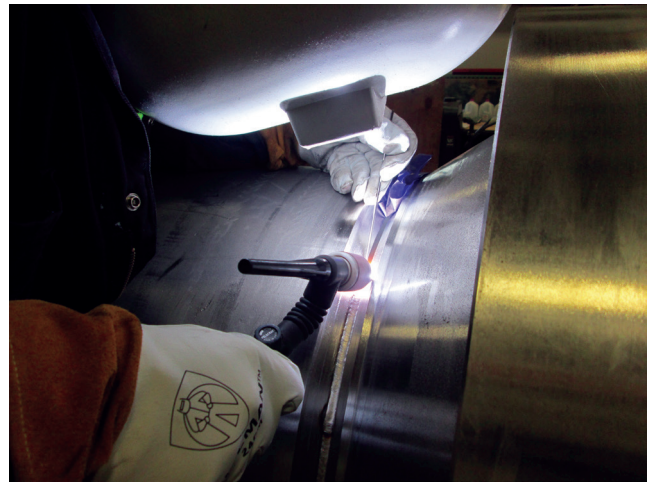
Observations of a GTAW root pass, 24 in. diameter, 316L Stainless Steel pipe.
